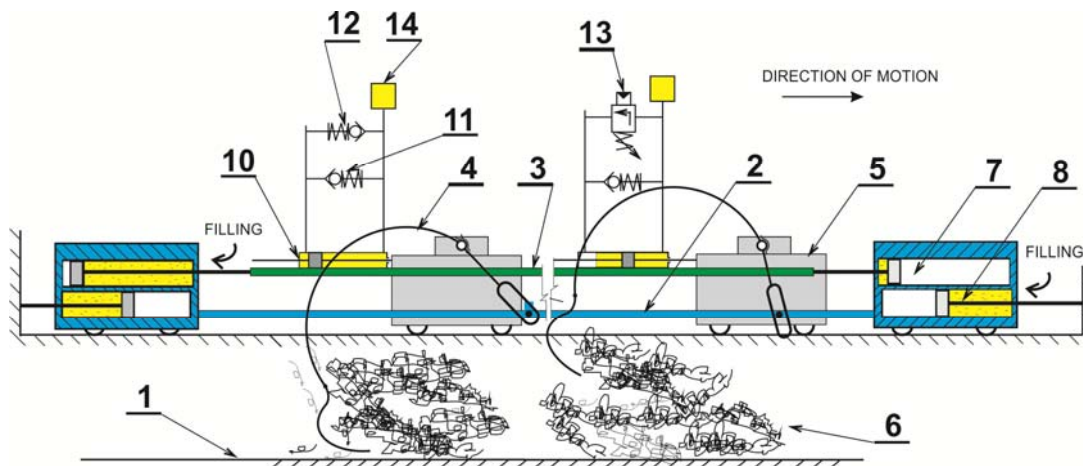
Schematics of the trolley conveyor of metal chips with the hydraulic equipment
